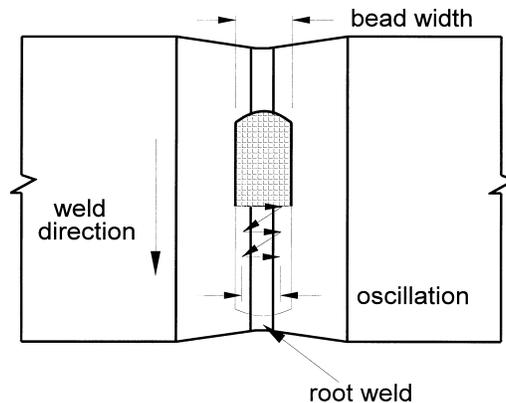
Bead Oscillation and Weld Direction for the STT Mode.
